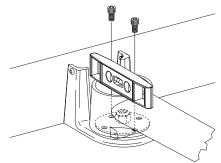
Adjustment - Arm Assembly Leveling Side to Side
